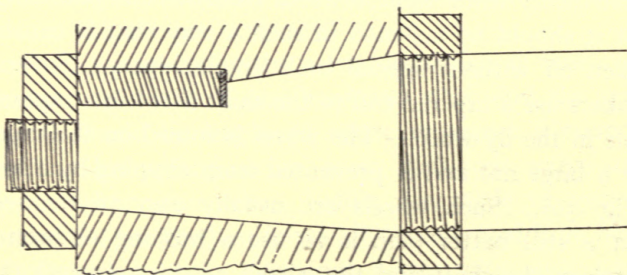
Tapered Fly-wheel Shaft with Releasing Nut
